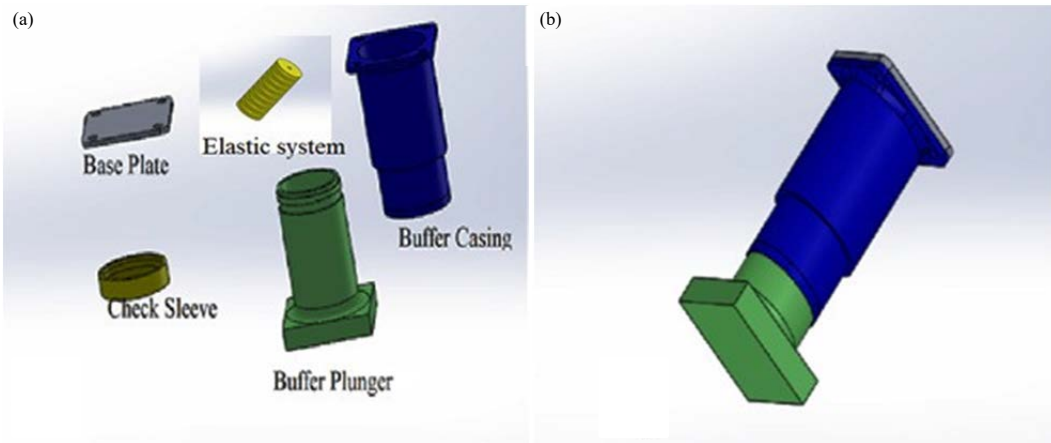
(a-b): Exploded view of (a) Crash buffer FE models and (b) Assembled view of crash buffer
